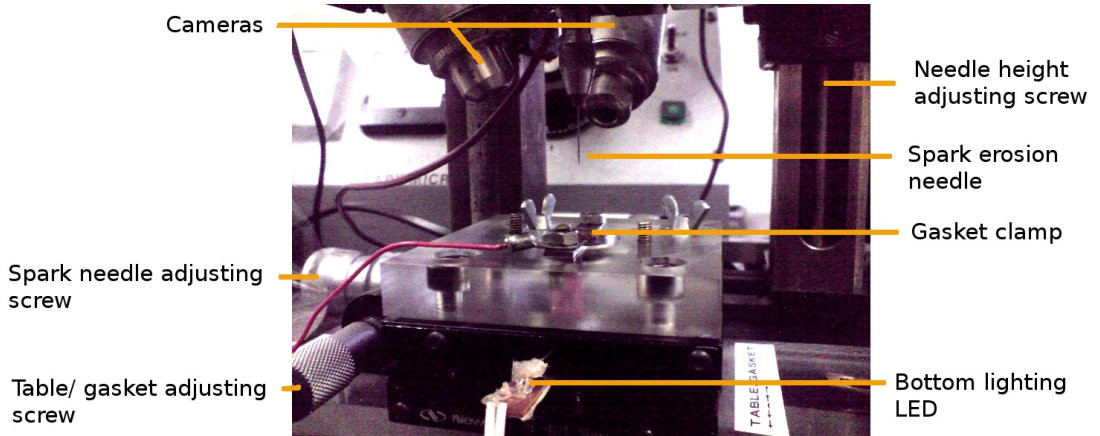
Spark erosion machine - Spark erosion machine used to start the hole in the gasket material after which a pin vice and micro drill are used to clean up the hole.
